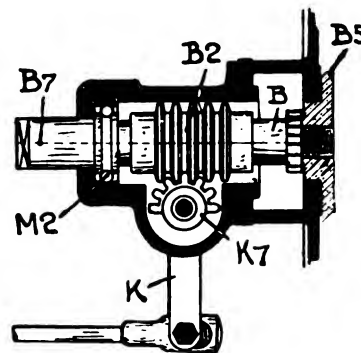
The Lacoste High-Tension Magneto. Sectional drawing, showing the "Timing" gear, by which the Armature is rocked over relatively to the shaft, B^1 , which is coupled to the engine.
